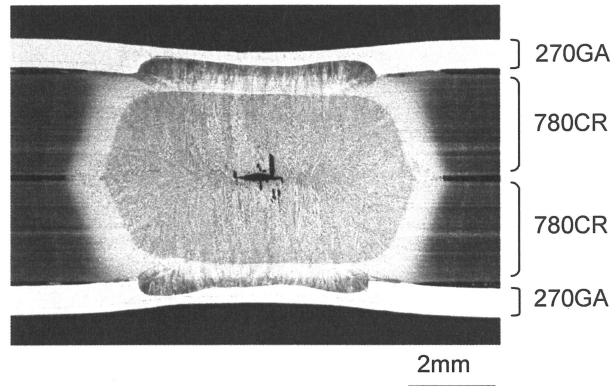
Cross-sectional macros of resistance spot weld of four sheet joint (sheet joint: 0.7mmt+2.3mmt+2.3mmt+0.7mmt; sheet thickness ratio: 8.6).
